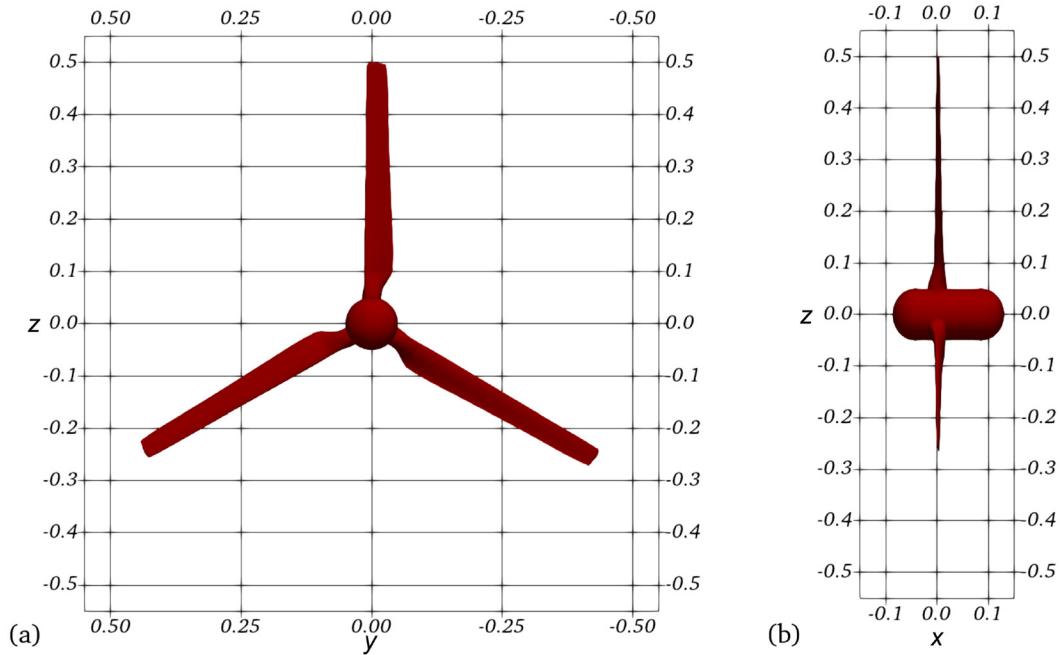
Geometry of the rotor: (a) frontal view and (b) side view.
